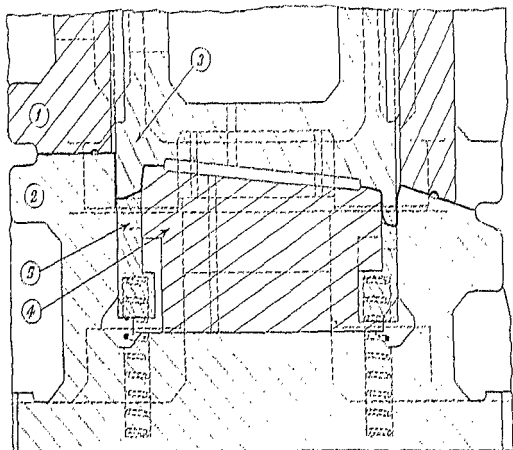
Drawing of metal from outside and inside edges of blank to produce a station-wagon lift-gate inner panel. (Ford Motor Co.)
